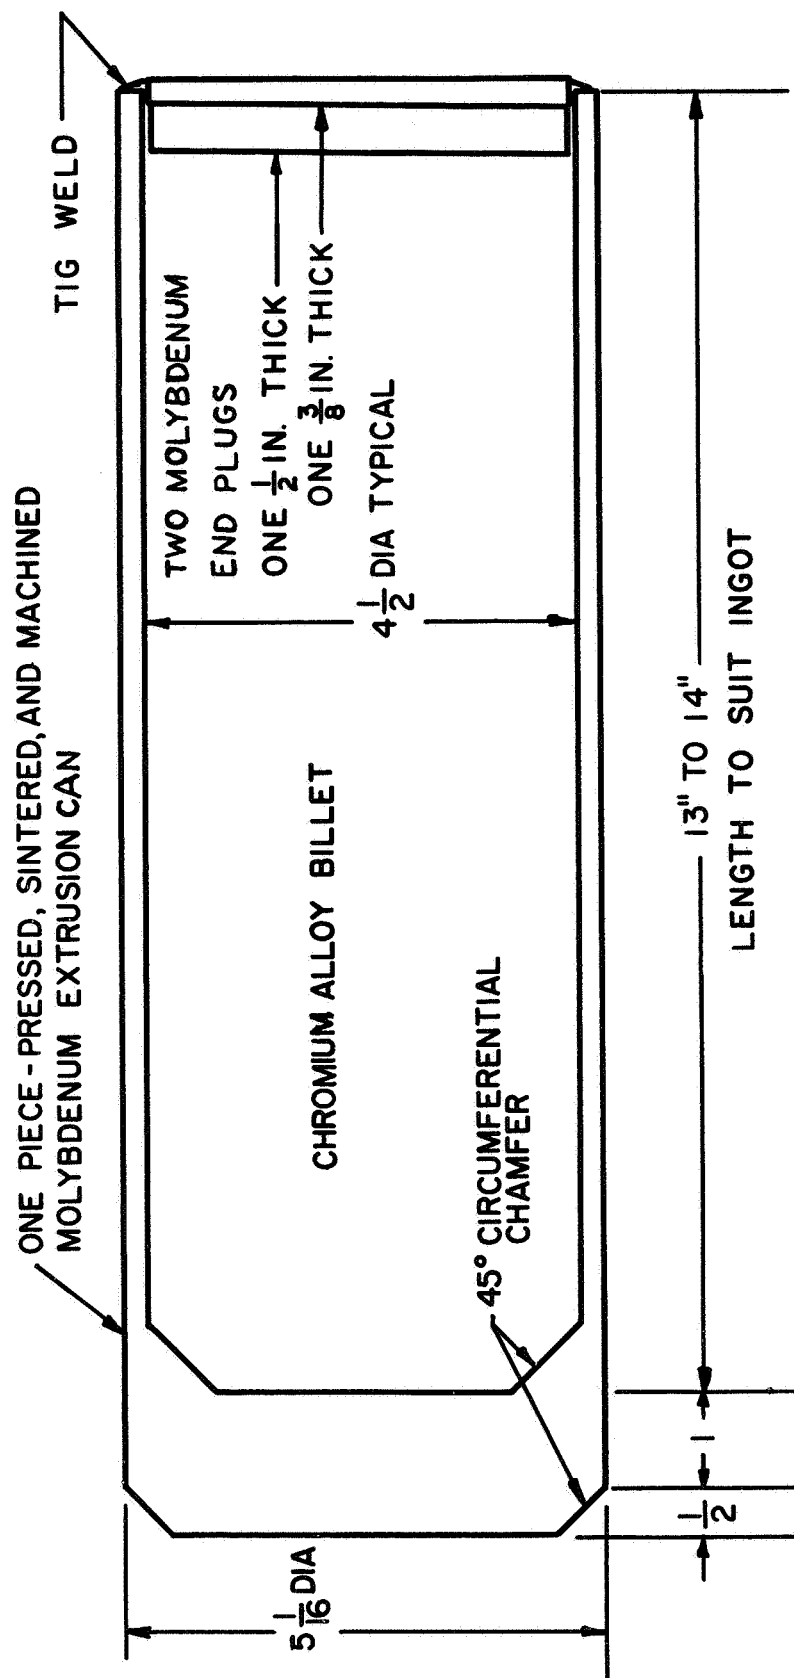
SCHEMATIC DIAGRAM OF TYPICAL EXTRUSION CAN AND BILLET ASSEMBLY
